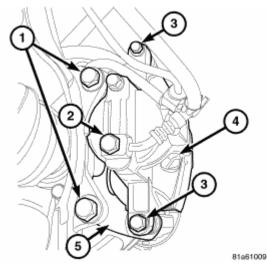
Disc Brake Caliper Components Courtesy of CHRYSLER LLC
